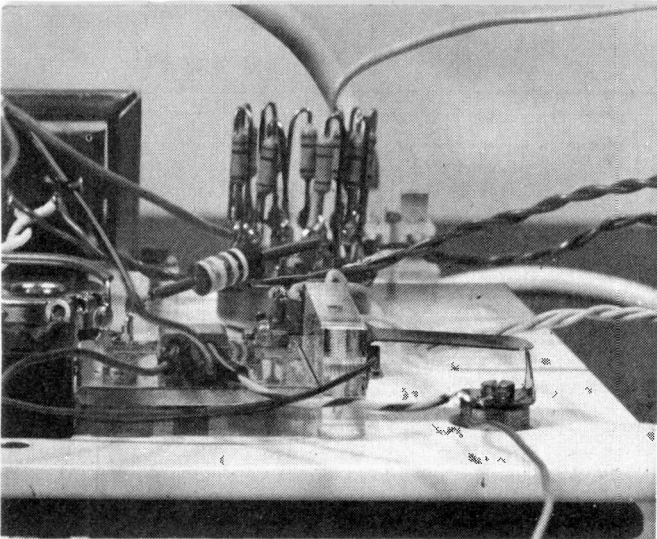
Veroboard sub-chassis showing assembly and wiring
